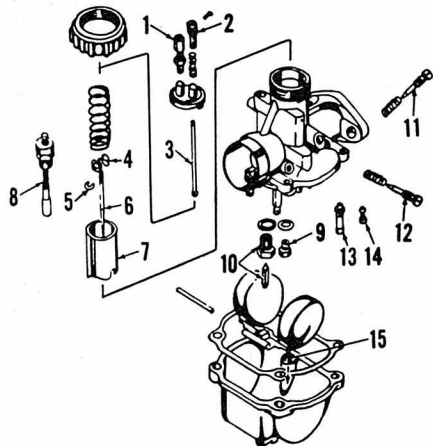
Exploded view of typical VM type carburetor. Model VM20 SC uses a choke instead of starter valve shown.
